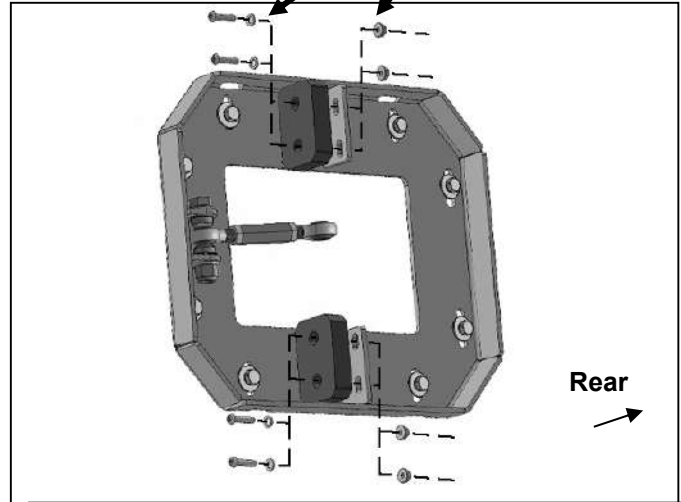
Assemble the Swing Arm Adjuster assembly. IMPORTANT: Adjuster Sleeve, Rod Ends and Jam Nuts feature right hand and left hand threads. Do not mix hardware.
